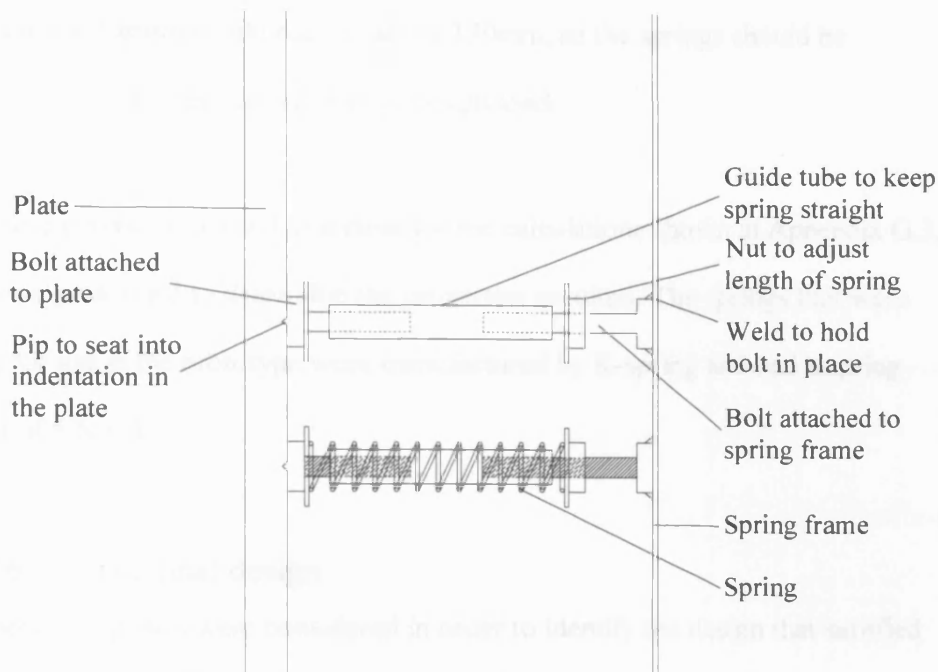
The mechanism to allow the length of the springs to be adjusted.
